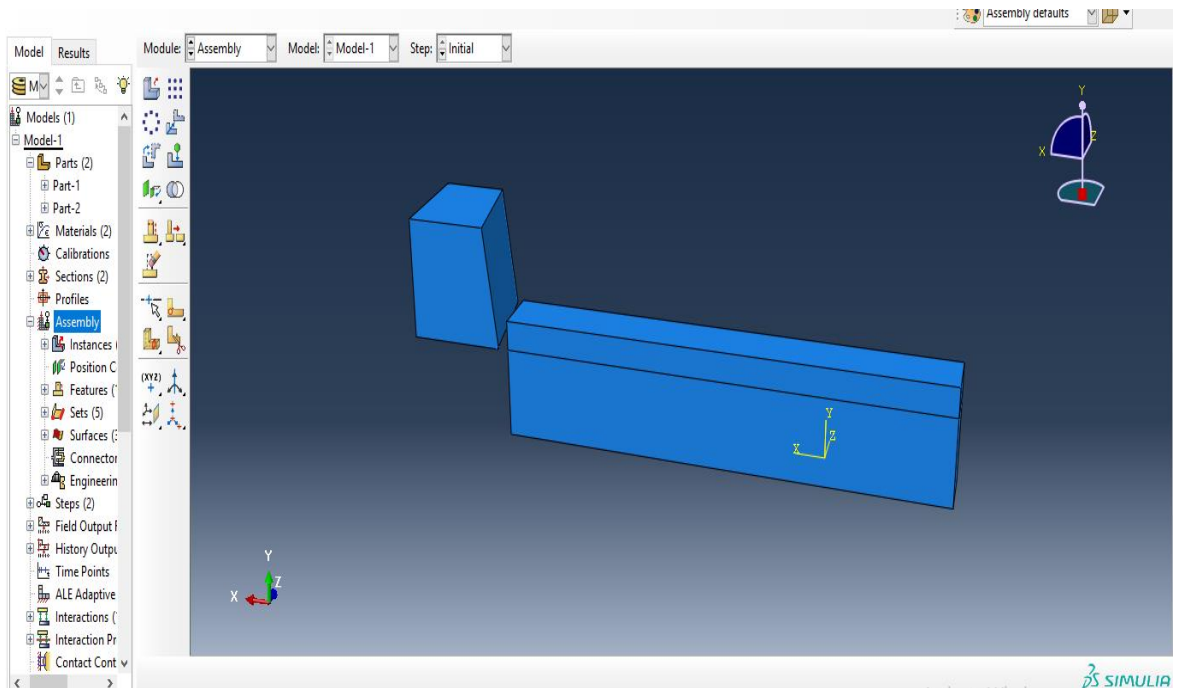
Part Design for Tool (ABAQUS Dialogue Window, Version 6.13.1)
